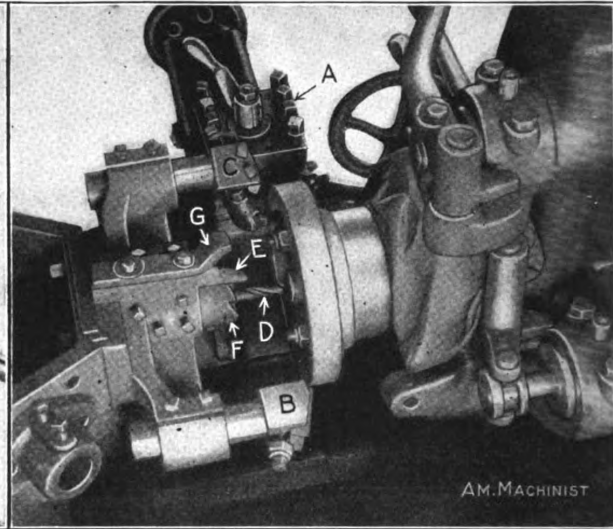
TOOL LAYOUT FOR MACHINING FLYWHEELS
